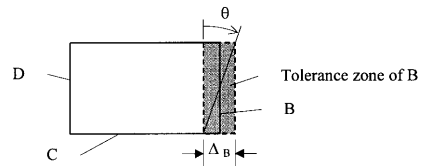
Two-dimensional tolerance zone of face *B* of the part.
